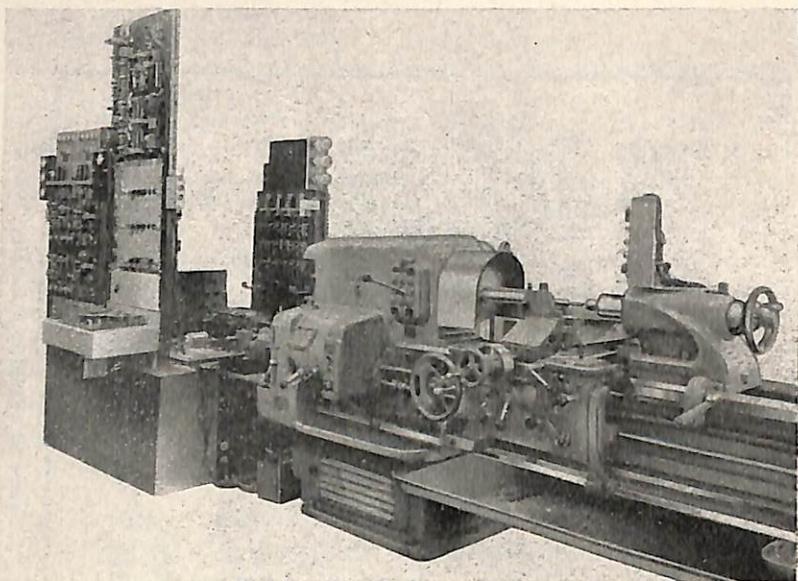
American Pacemaker 16-in. Lathe equipped with the G.E.C. "Record-Playback Control"
